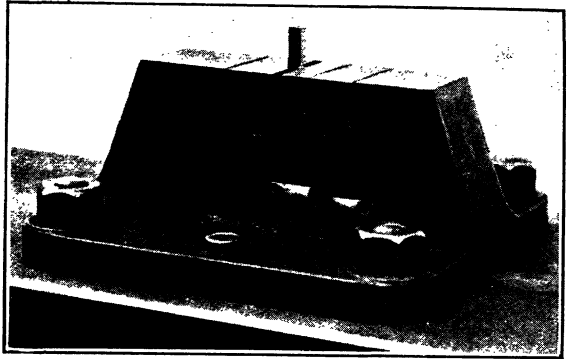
Method of holding Test Piece in Izod Impact Testing Machine.
